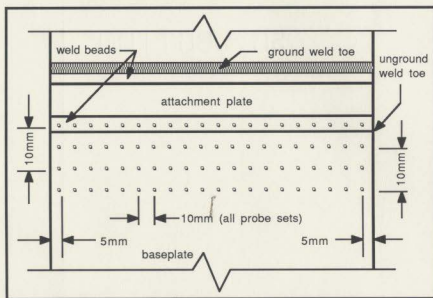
Top view of T-plate illustrating ACPD probe positions.
